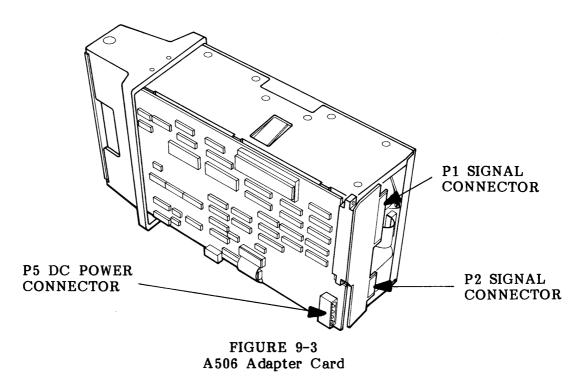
also shows the installation of the A506 Adapter card to the drive. A jumper must be added on the Drive Control card to provide +5 VDC power to the A506 Adapter card over P1, Pin 1 to power this assembly. In addition, there are other jumper plug set up requirements on the Drive Control card for operation with the A506 Adapter card. (See Subsection 9.7.1 for details on these jumper plug set up requirements.)
